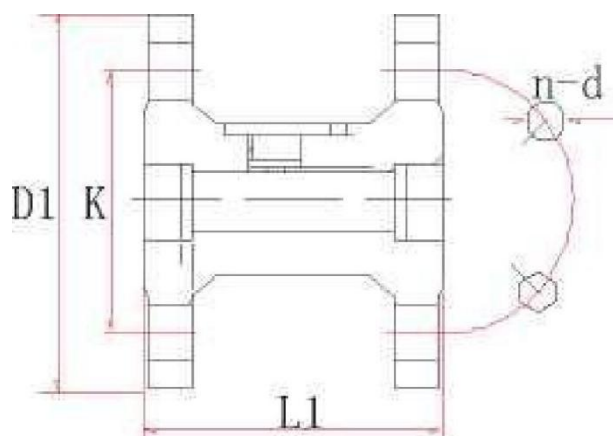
Dimensions of DN15~DN200 Flange-Connected Turbine Flow Sensors
